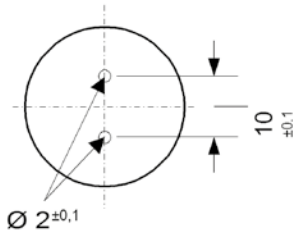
SI - Standard 2 pin snap in version and mounting hole dimensions (mm)
